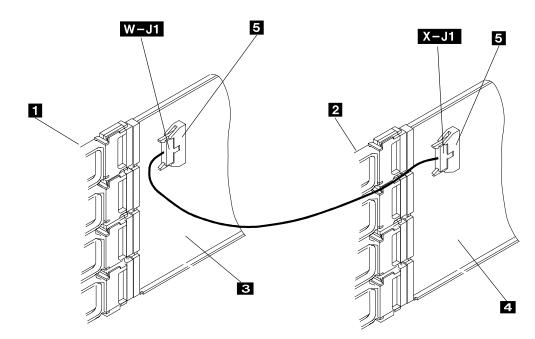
Cable 1 (PN 43G3180) Routing on a TSSB board
